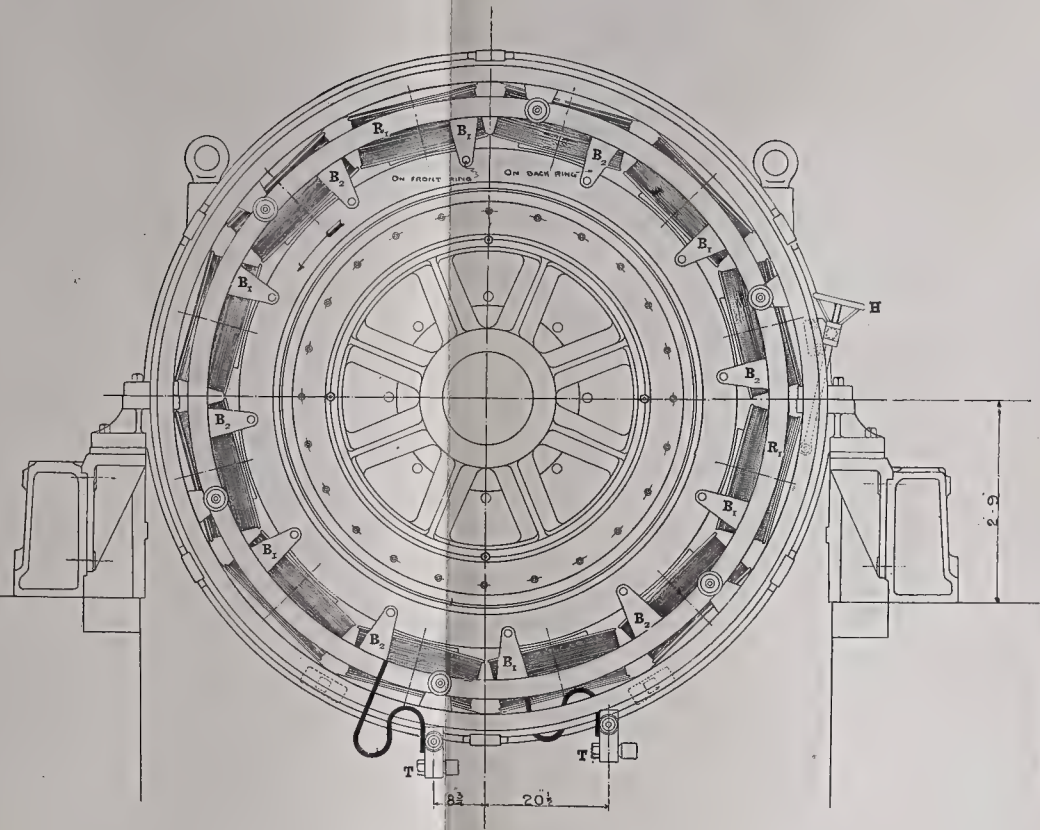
Magnetising Coils used by the English Electric Manufacturing Co.
